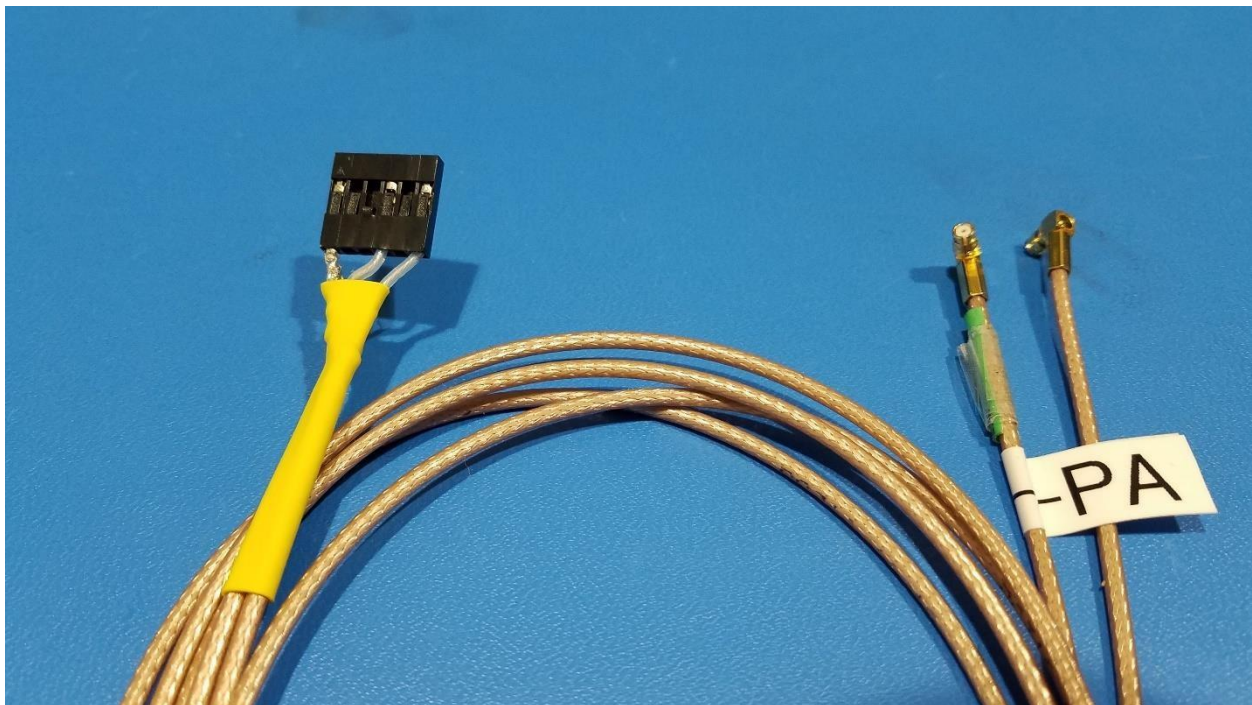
STLP cable showing both ends. 0.1” 6pin housing and push-on SMP connectors
